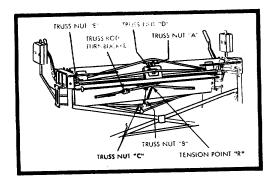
Rear View of Brake Showing Tension Adjustment Points
